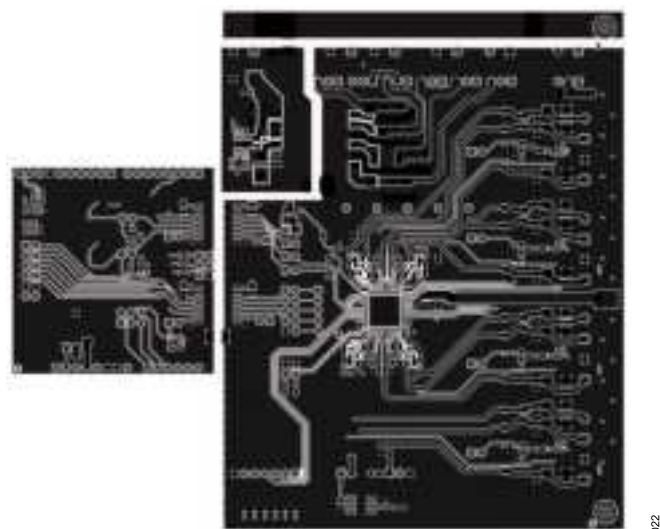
EVAL-AD74416H-ARDZ Layer 1, Top Layer
